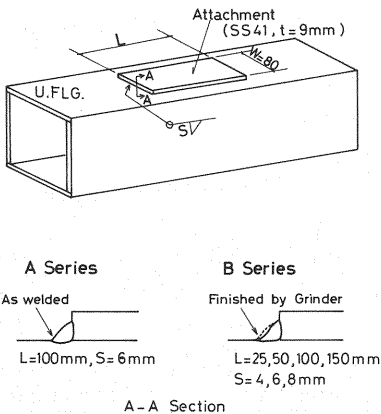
Dimension of Attachment and Welding Details.
